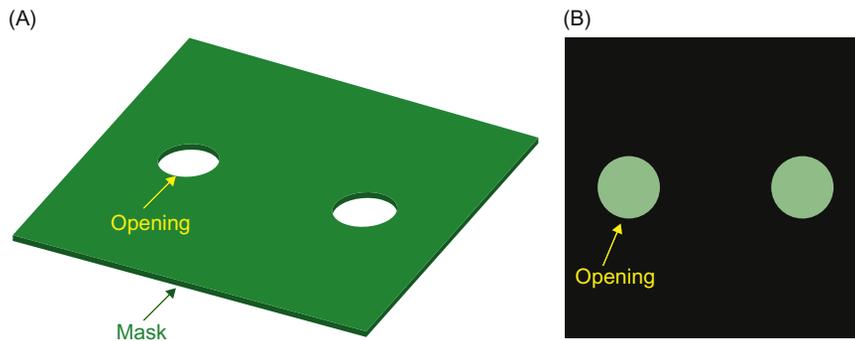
Soldermask layer and negative view: (A) soldermask and (B) negative view in PCB Editor.
